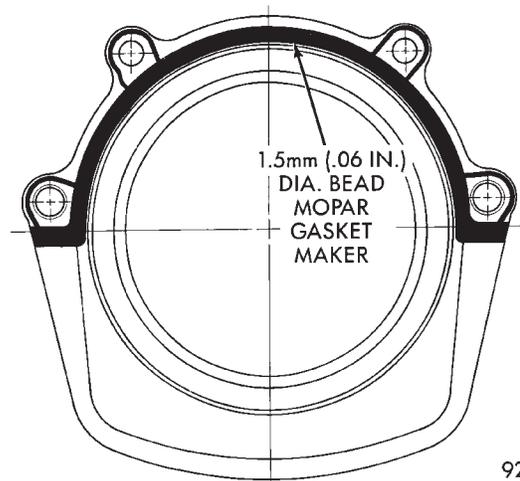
Rear Crankshaft Seal Retainer Sealing
